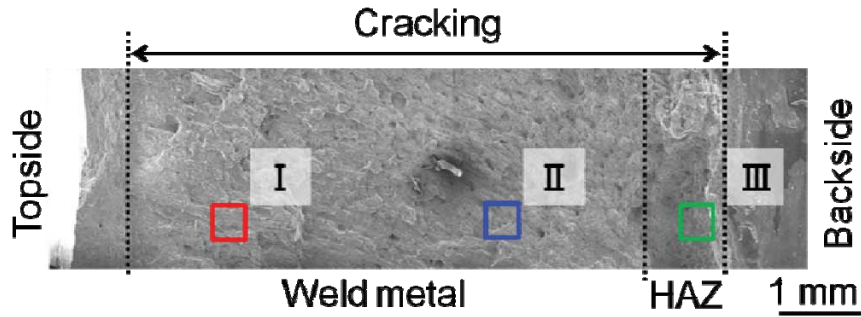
Observation of cracking weld with YGW-11 filler wire.
